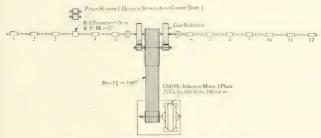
SHEET MILL, SENECA IRON AND STEFL CO., BUFFALO, N. Y. Both top and bottom rolls of No. 3 mill are driven. On other mills, the bottom roll only is driven.
